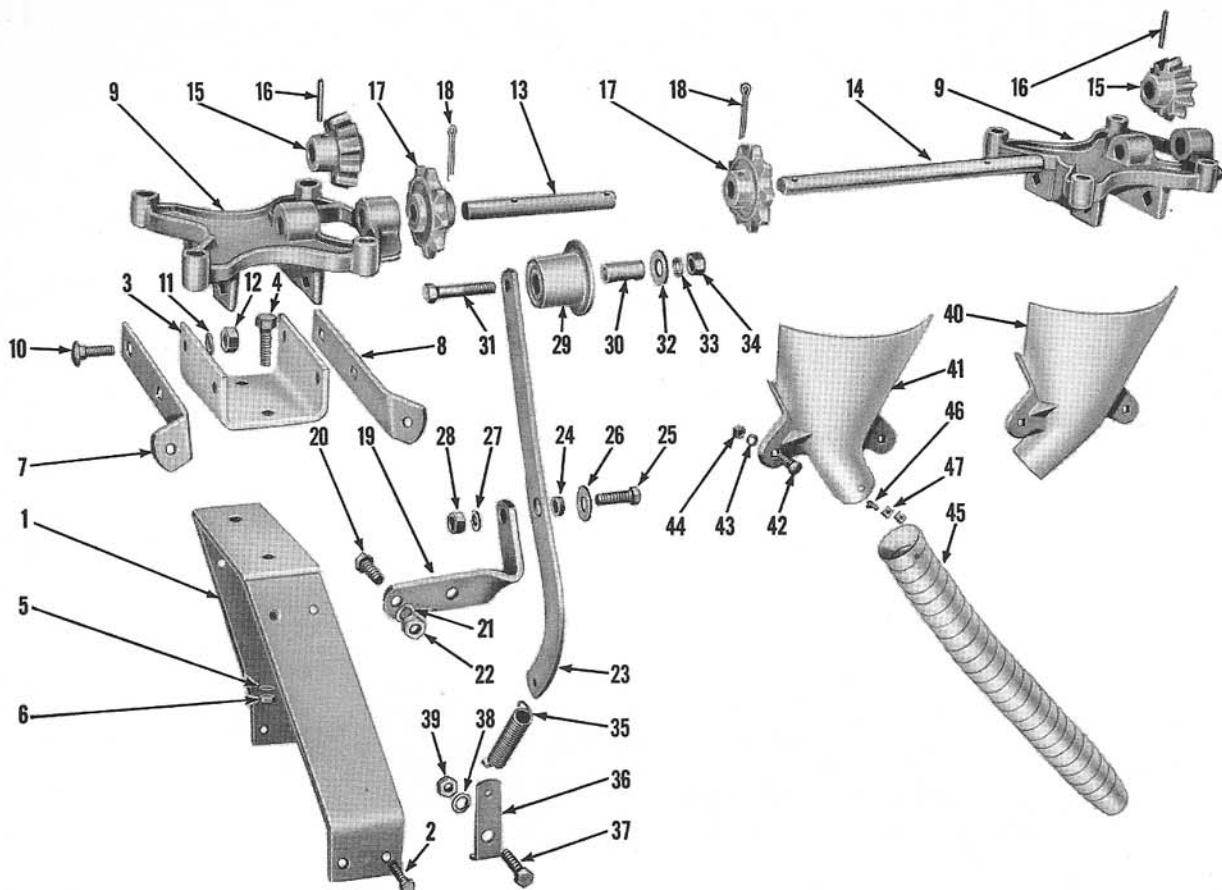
Fertilizer Mounting & Drive Parts for Models 12-50, 62
